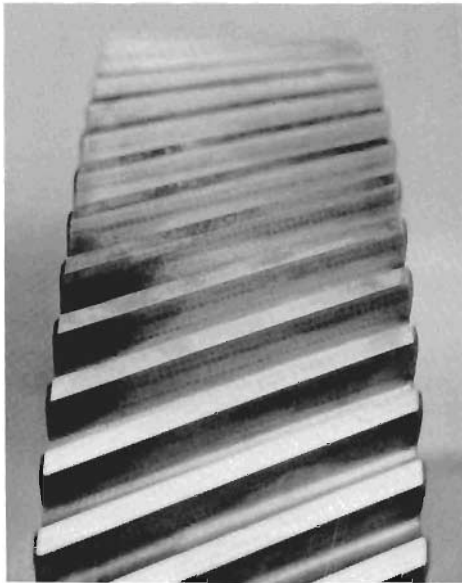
Helical gear carburized and hardened to 60-63 HRC. A chattering tooth grinding wheel has “burned” small consecutive spots the full length of the profile on several teeth. Discovered by nital etching.
